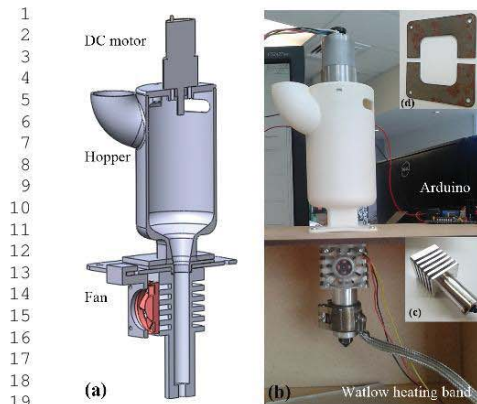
Pellet extruder with hopper. (a) Cross-section of the CAD model, (b) Assembled extruder with hopper on testing rig with heating band around extruder barrel, (c) Close-up of hot end (d) Fan bracket, a 2 mm laser cut steel plate.
